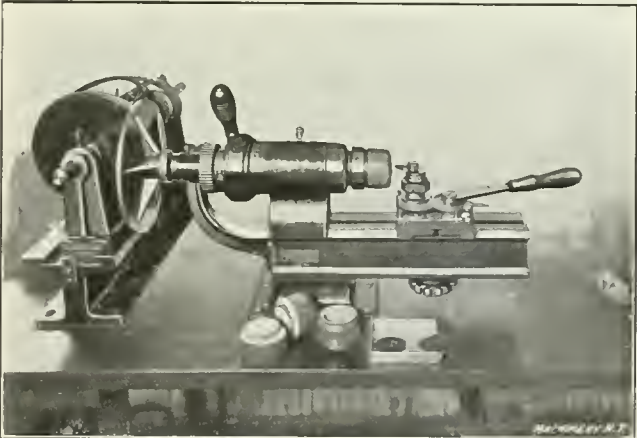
Special Wood-turning Lathe with Spring Chuck and Operator
